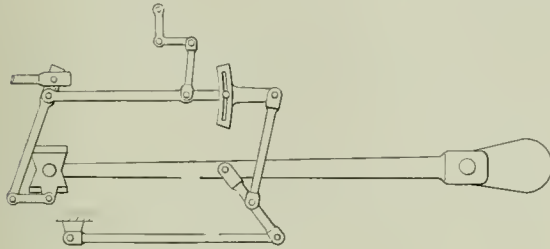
Valve Gear as Applied to Etat 4-4-0 Type
